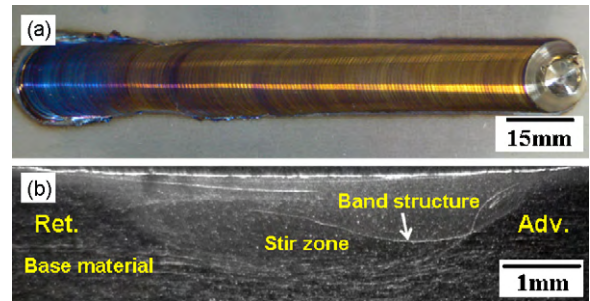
(a) An external shape and (b) macrostructure of the weld zone. Adv. and Ret. indicate the advancing and retreating sides, respectively.
